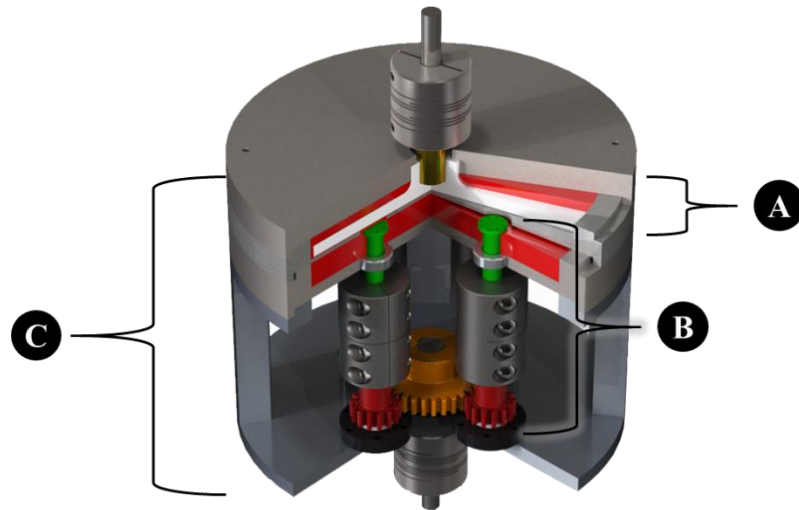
Assembly components. A.) Cone assembly; B.) Tissue mount assembly; C.) Bioreactor case assembly
